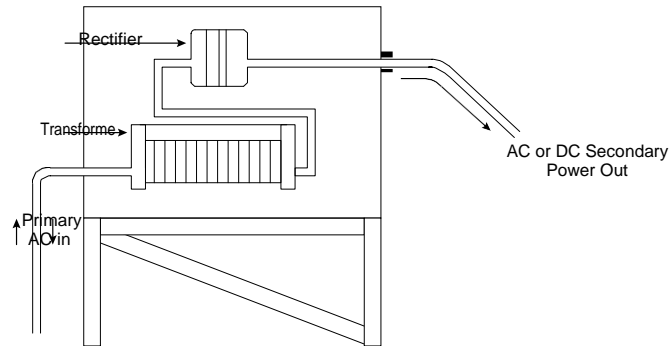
AC/DC welding machine - AC driven (rectifier)
